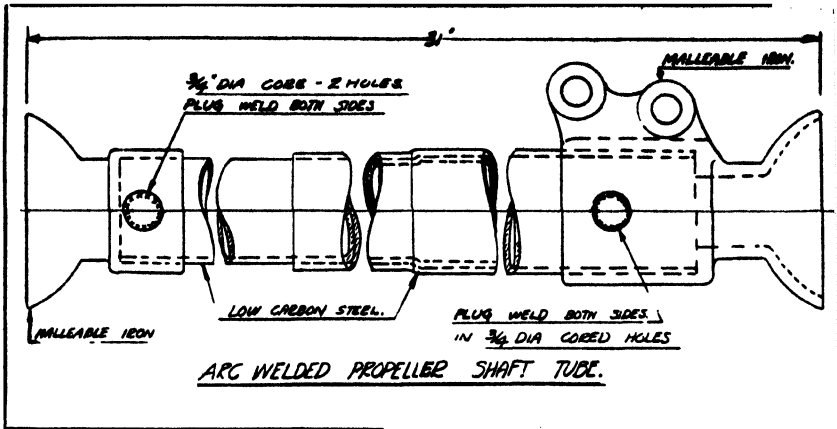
, (above). Sketch of arc welded propeller shaft tube. Fig. 13, (below). Arc welded propeller shaft tube.
